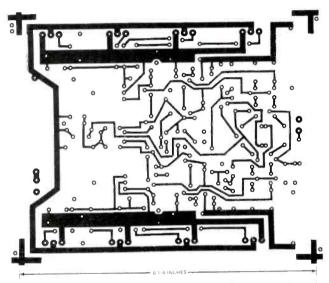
THE SOLDER SIDE of the amplifier board. Remember that you need one board for each channel.
